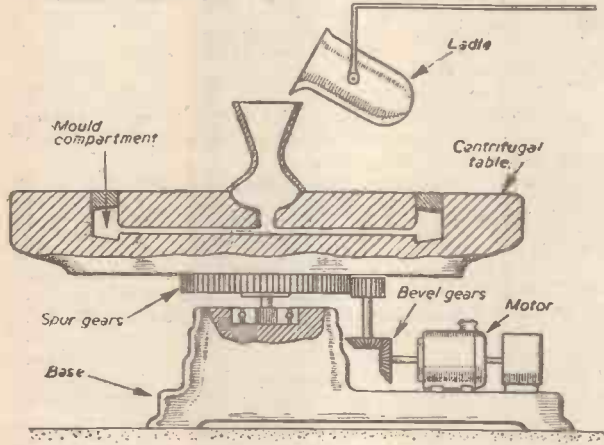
Diagrammatic sketch of a centrifugal casting machine.
